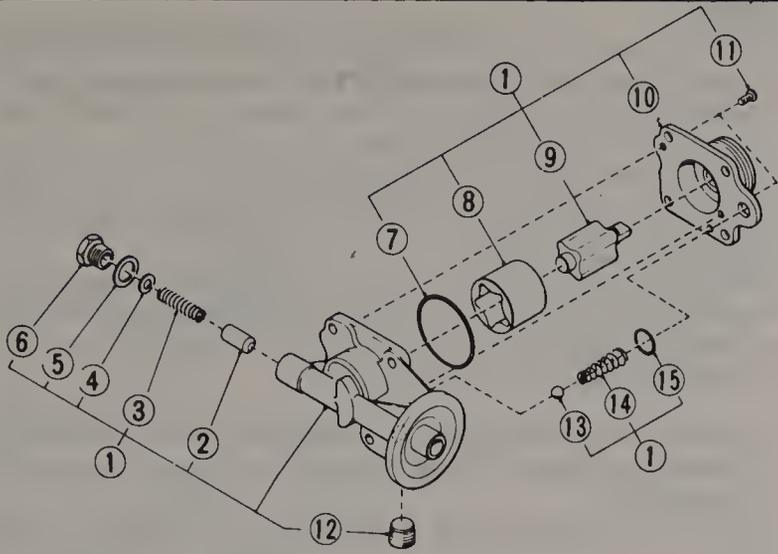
Oil pump components (1800 cc engine) – exploded view (Sec 9)
